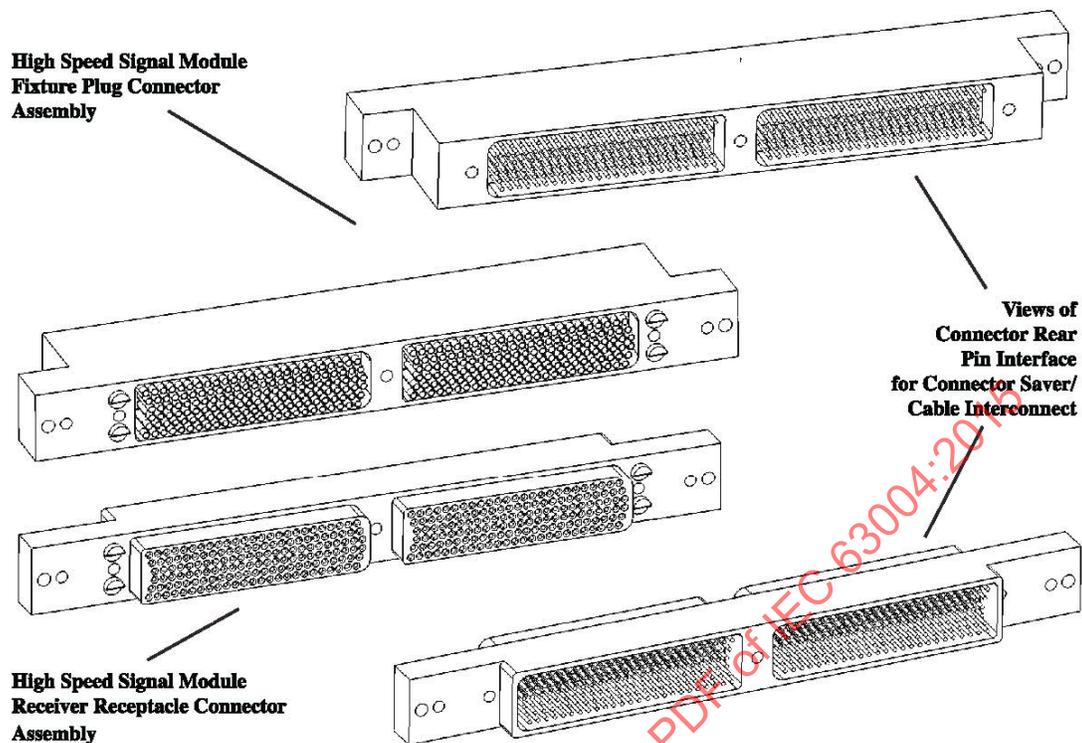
High-speed signal module connector pin and receptacle assembly implementation
